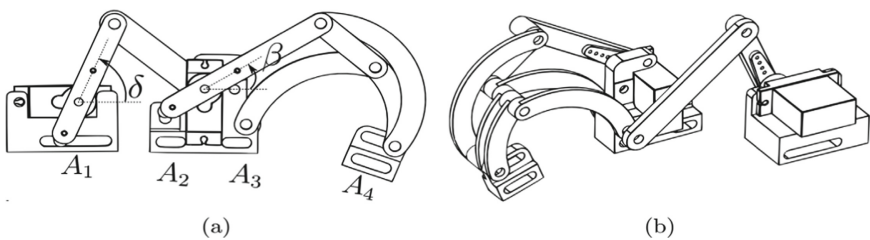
CAD of ExoFing: a) Frontal view, b) Isometric view
